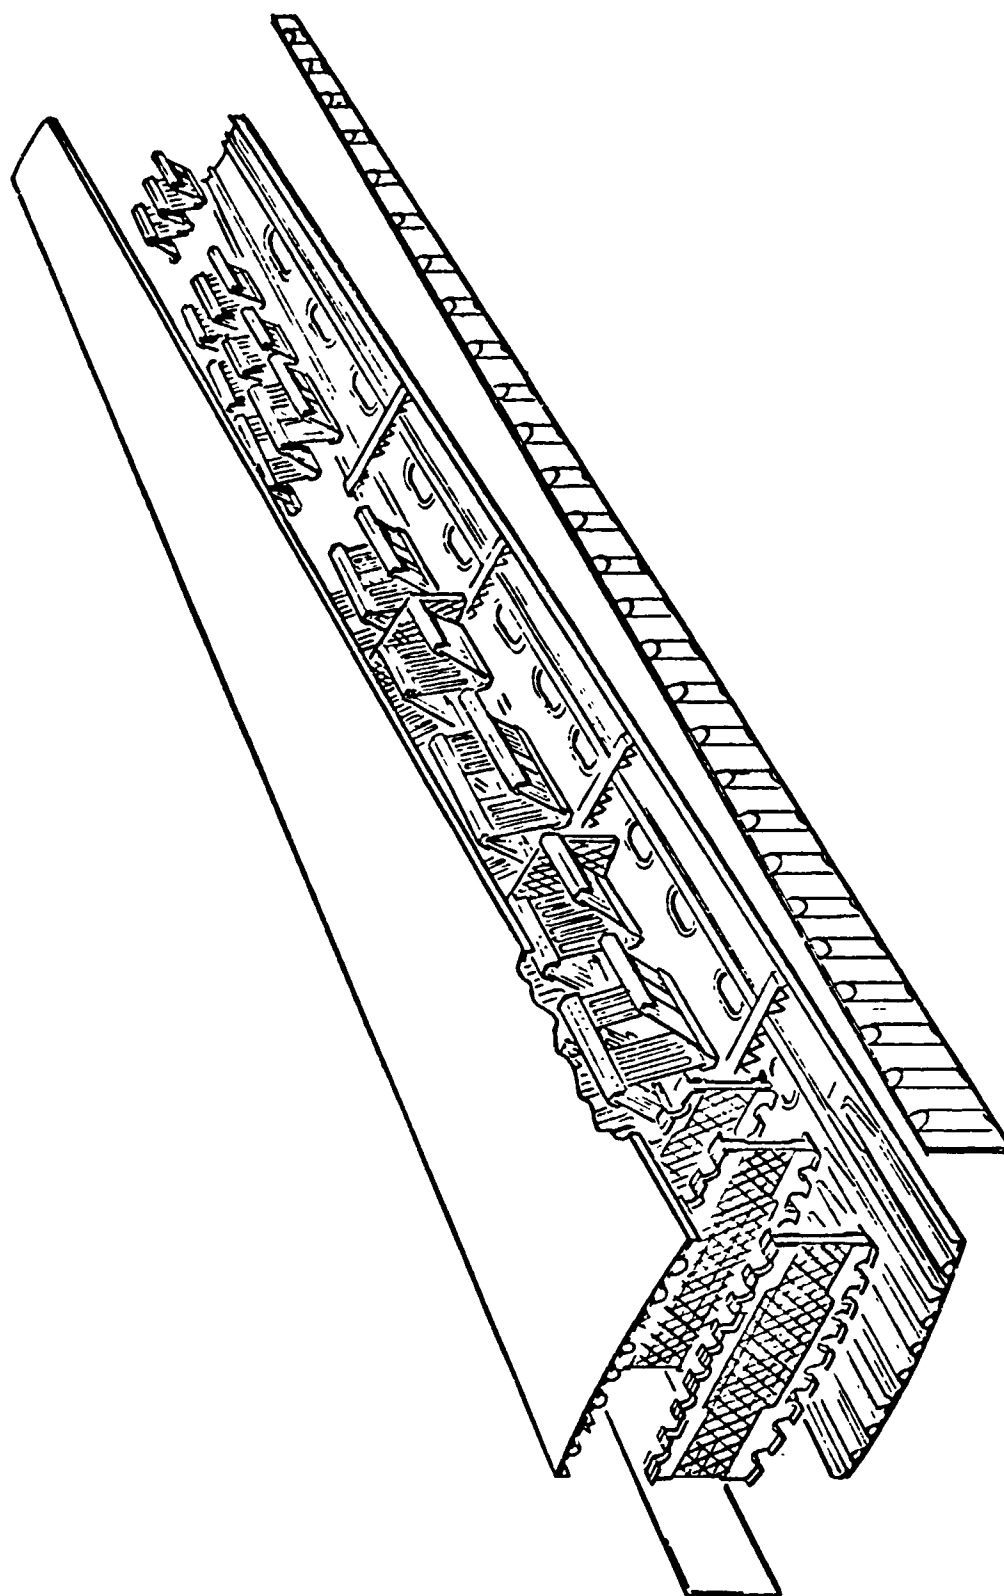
EXPLODED VIEW OF COMPOSITE WING BOX STRUCTURE
